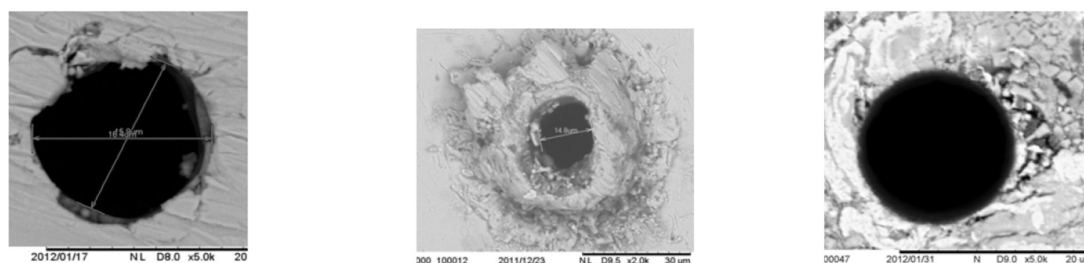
SEM pictures of the hole a) Laser beam outlet; b) Laser beam inlet ; c) Hole after FIB cleaning
